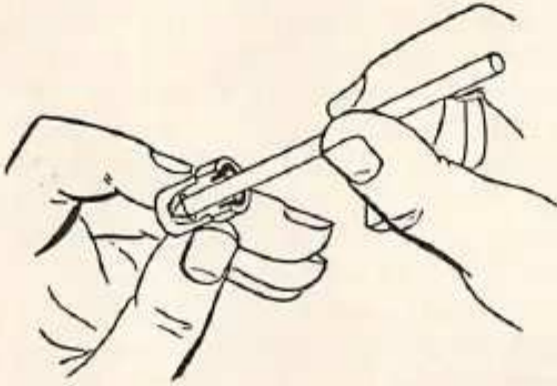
Use wooden stick and small amount of tallow to polish valve seat.
